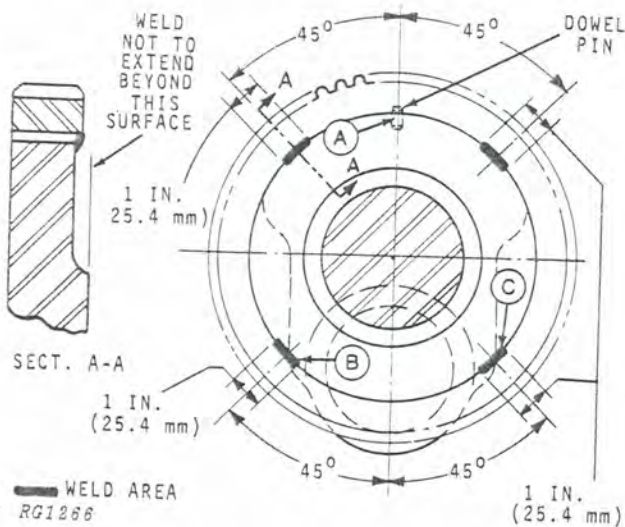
Crankshaft Drive Gear Welding Diagram
